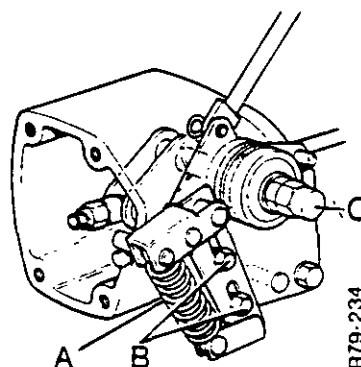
QUADRANT SPRING SETTING FOR TRACTORS WITH CAB
